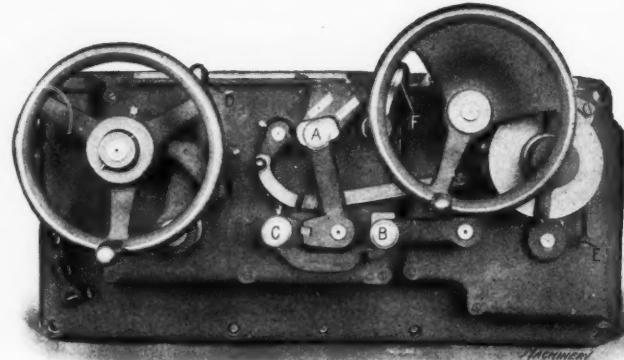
Control Mechanism of Table Feed on Pratt & Whitney Surface Grinder
